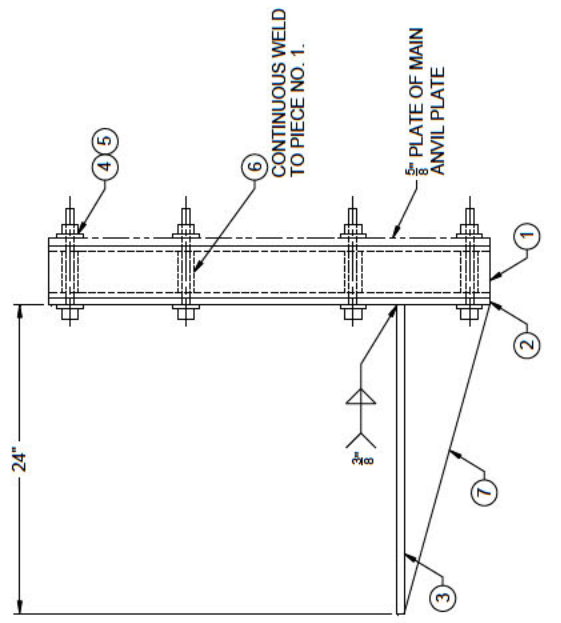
Fixture 6E standard mounting for controller components (contactors, relays, resistors, etc.) (type "C" test LWSM).
